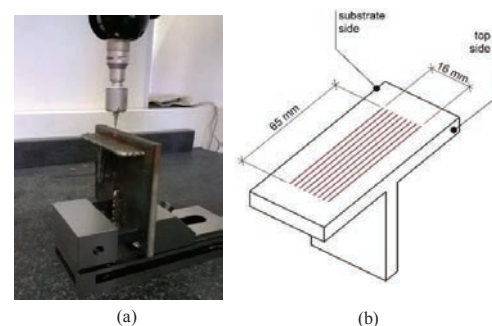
(a) Back surface acquisition on CMM machine; (b) Scanning scheme performed by the CMM machine.
